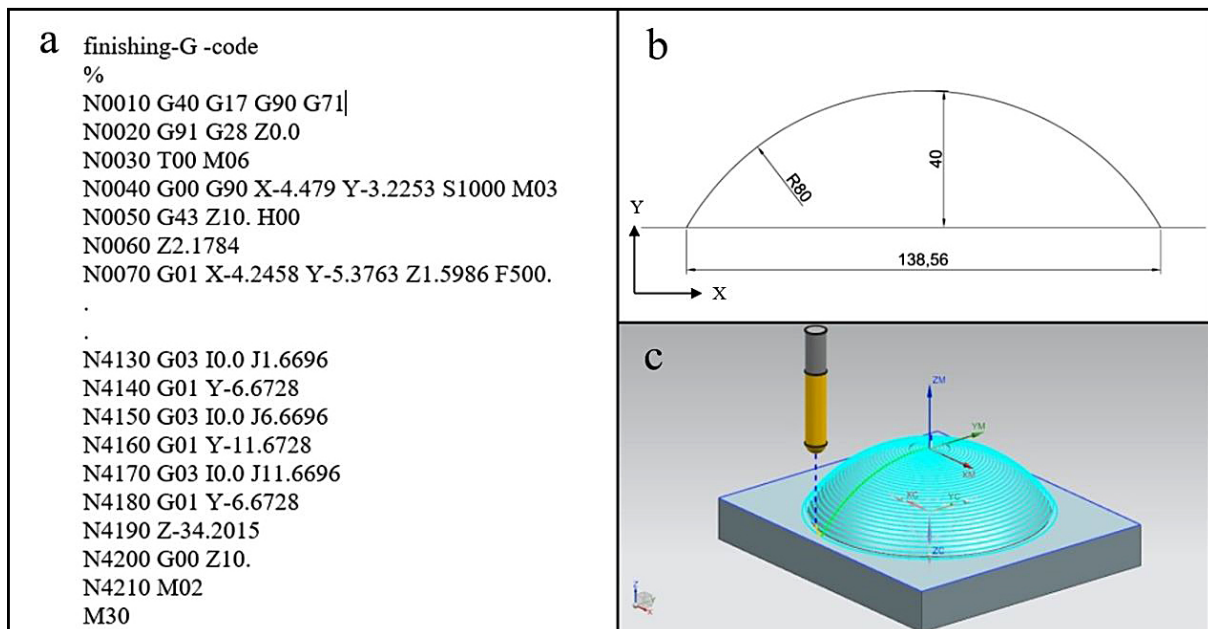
Geometry of forming part, a) G-Code, b) CAD Model and c) Tool path
